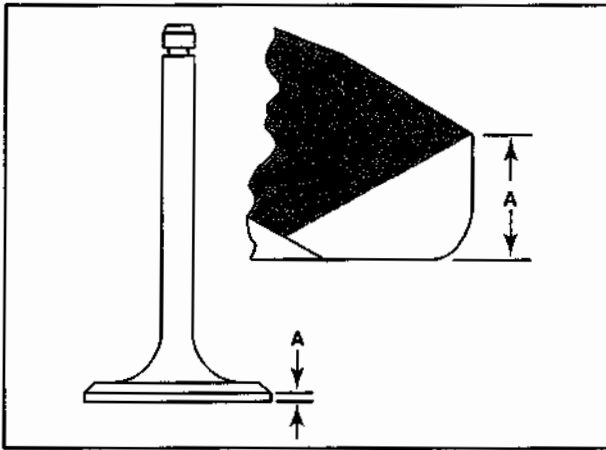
In order to reuse a valve, the valve stem must run true with the valve face and the valve margin must be within the manufacturer's specifications.
